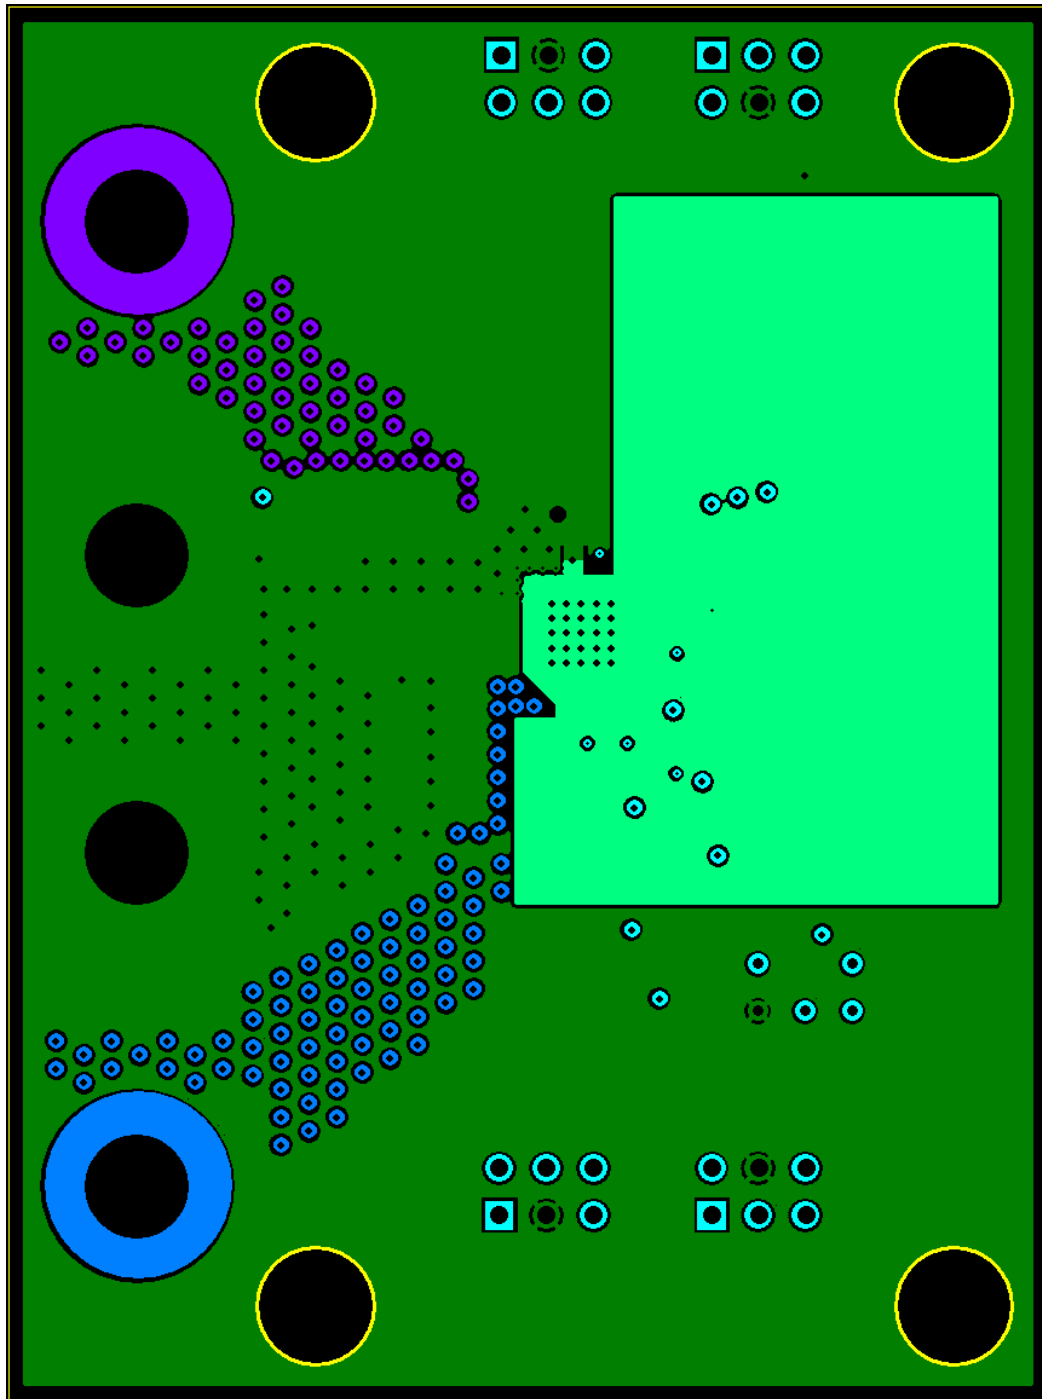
PCB - INNER LAYER 1 (VIEWED FROM TOP)
